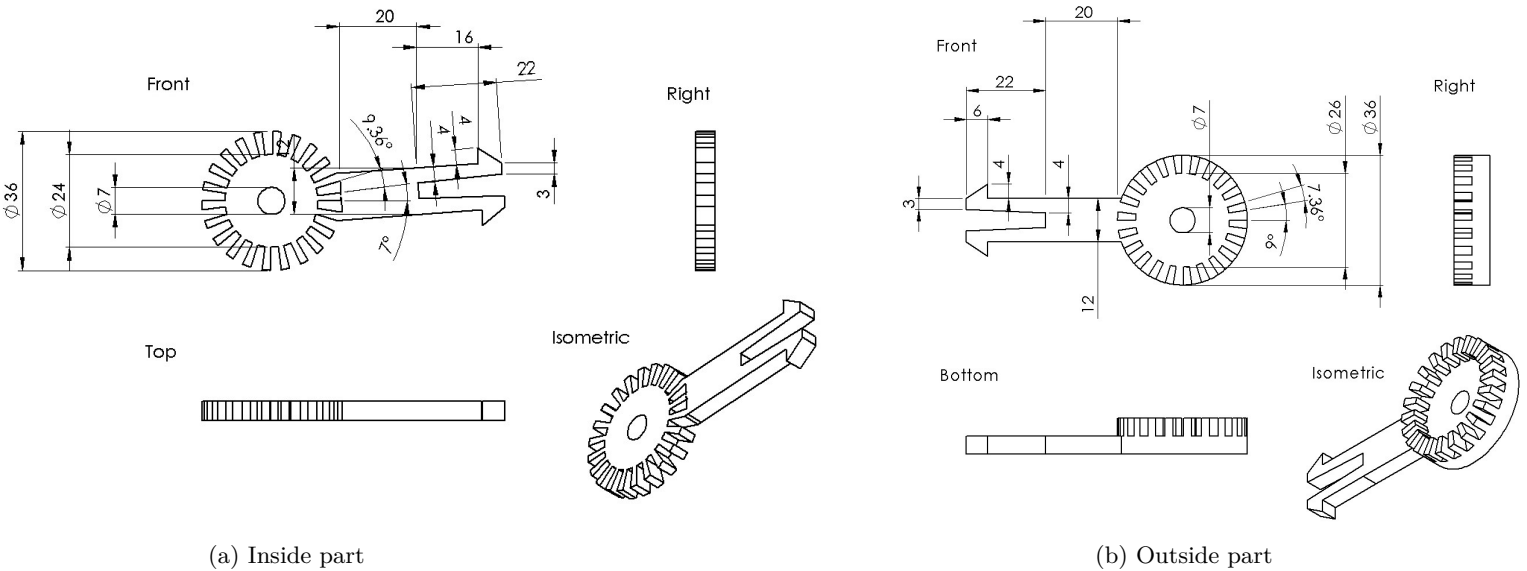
Technical drawings of the Small model of the blocking hinge design.
